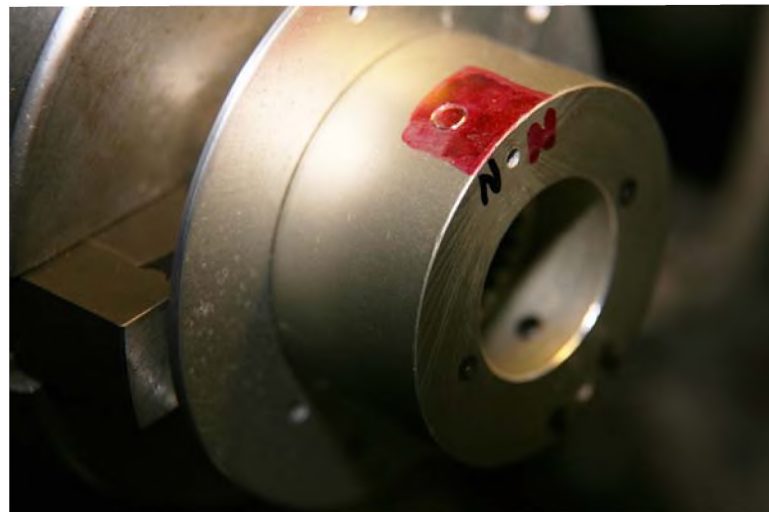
The bobbin is about 3" diameter with the opposite pole magnets opposite each other. The large disc at the rear is to stop knuckle grazing on the chuck jaws while I am holding the sensor over the rotating magnets
